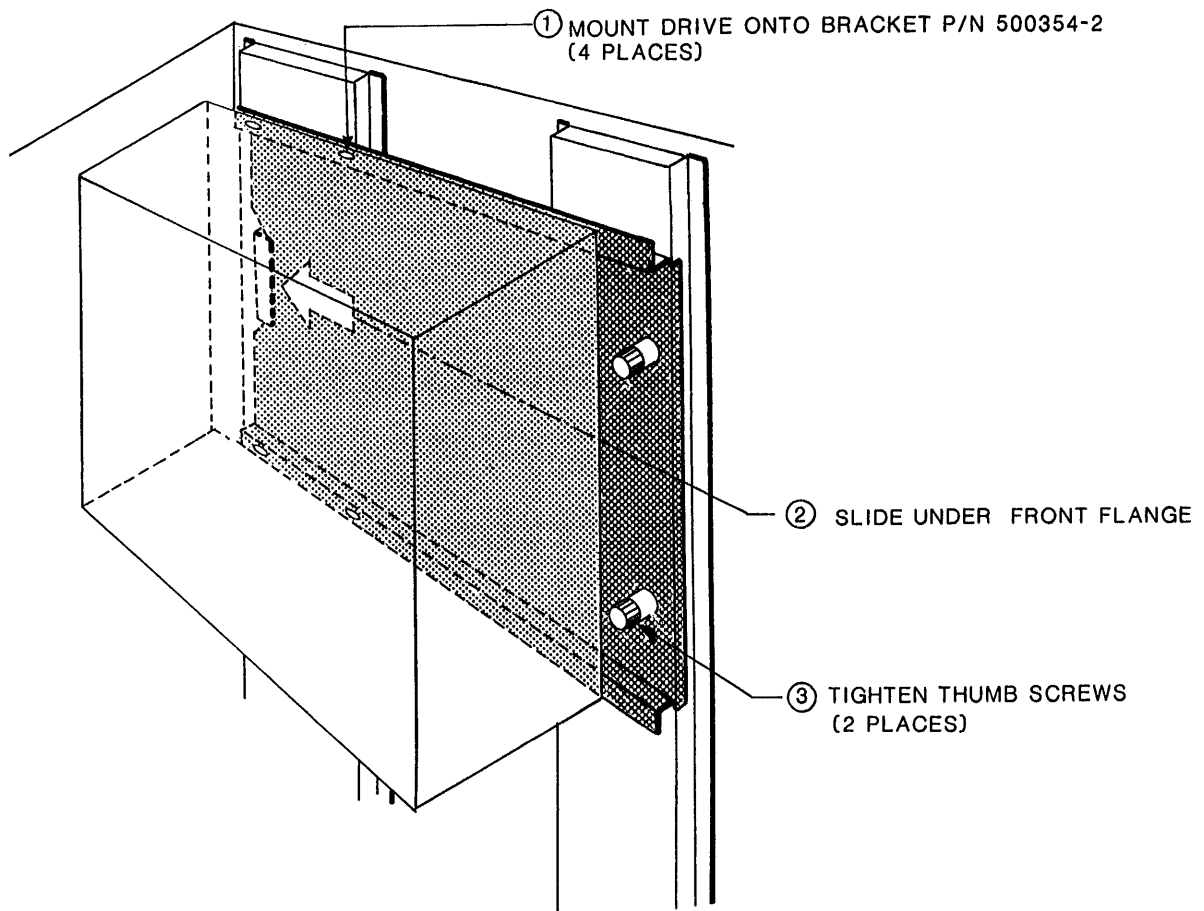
MOUNTING 8" REMOVABLE MEDIA DRIVES INTO CHASSIS
